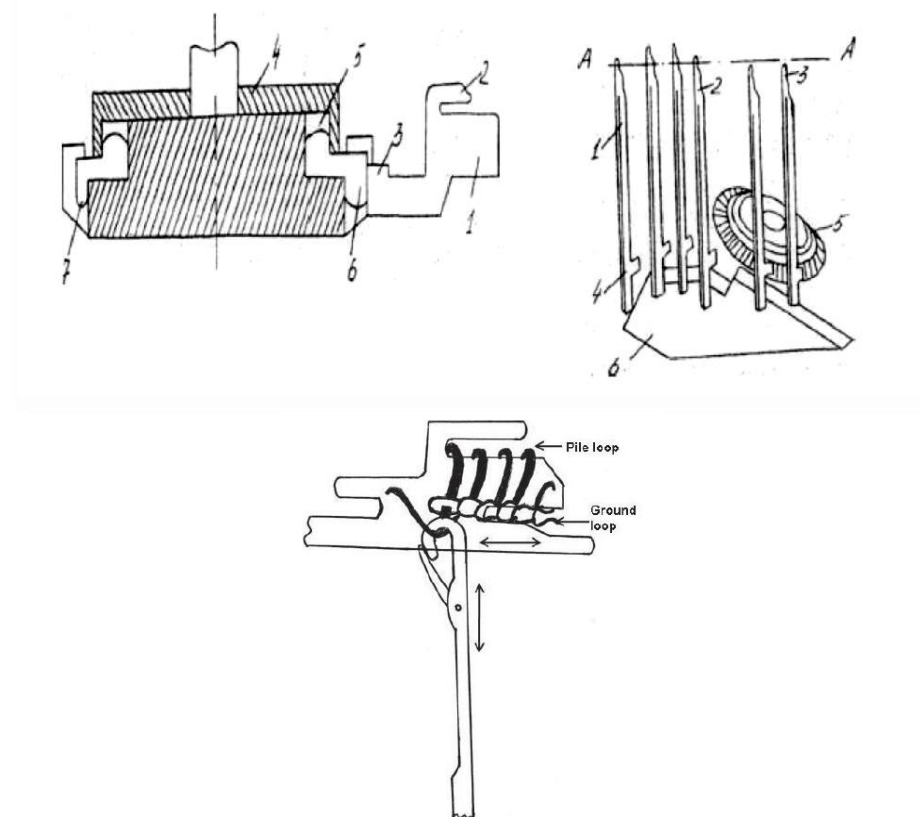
Shapes of plates used on a two-contour circular knitting machine to produce embossed plush knitwear
